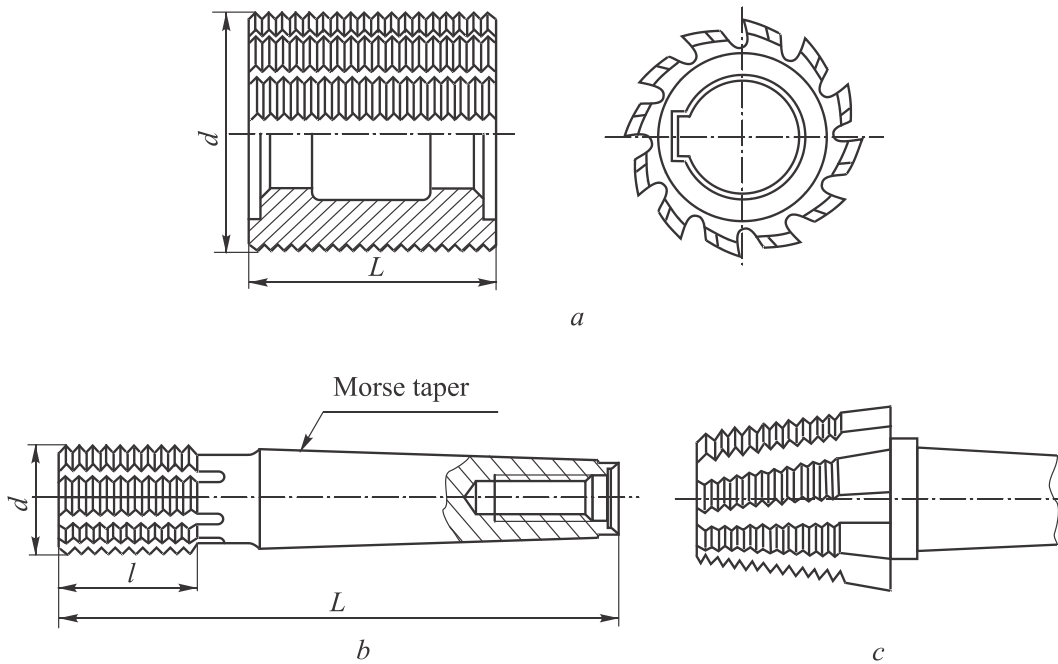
Multiple-form cutters: (a) straight shell; (b) straight shank; (c) for tapered thread
